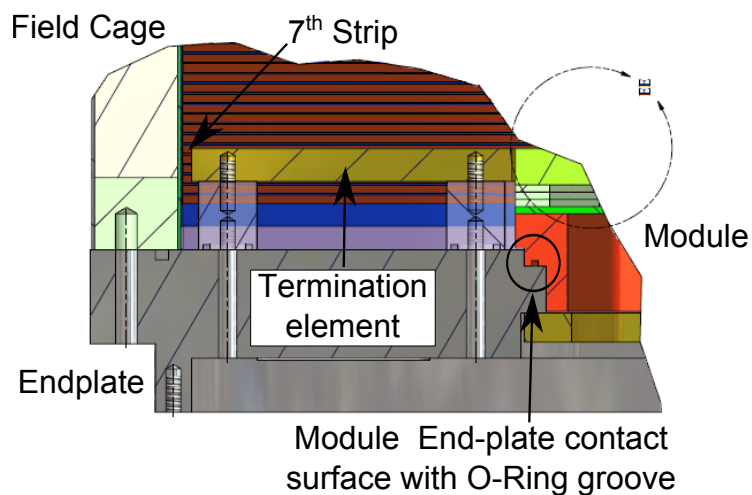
This drawing shows how the modules, and the termination plate are aligned with the seventh strip of the field cage (actually the sixth visible in this drawing) to form a single equipotential surface inside the TPC. An O-ring, placed in a groove at the interface between the module and the end-plate ensures the gas tightness of the whole system (Courtesy of Dan Peterson of Cornell University).
